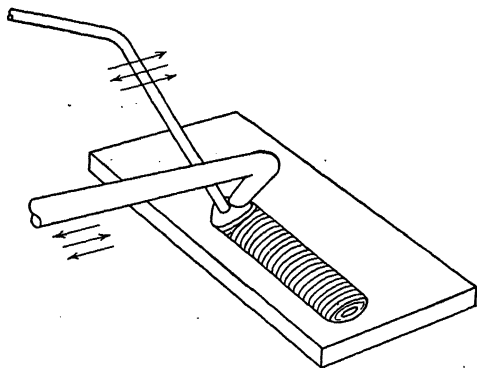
The end of the welding tip pointing ahead at a 45-deg. angle in the line of travel. The welding rod pointing into the puddle at a 45-deg. angle and straight in the line of travel.
